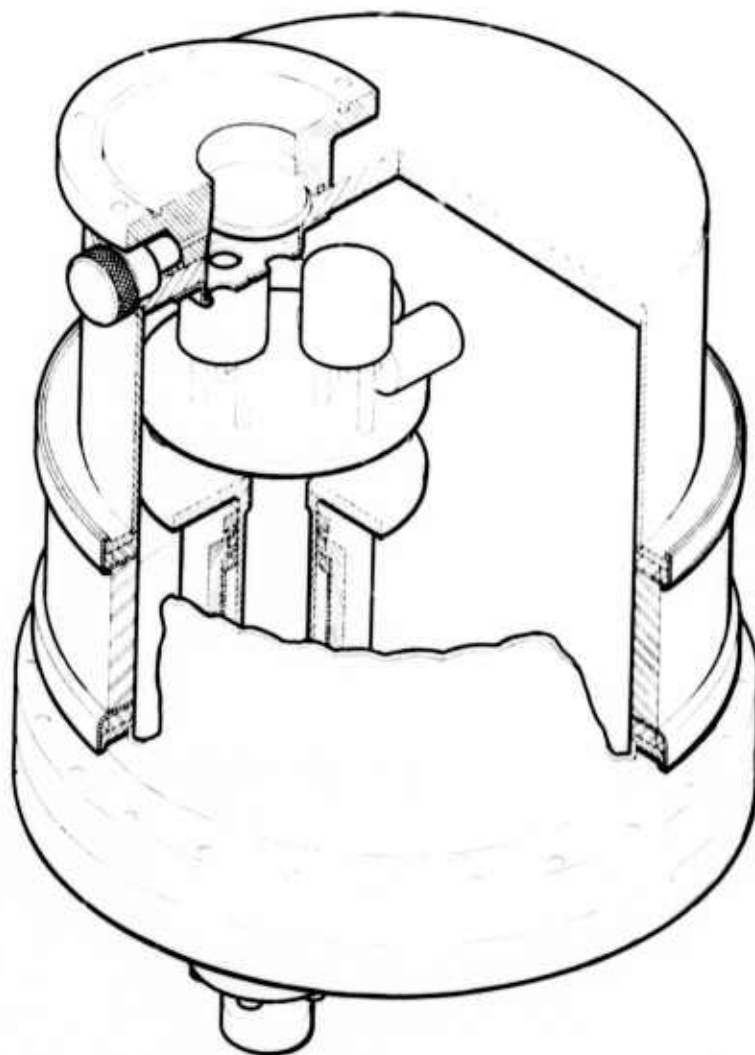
Isometric view of source chamber showing detail of source positioning mechanism.
